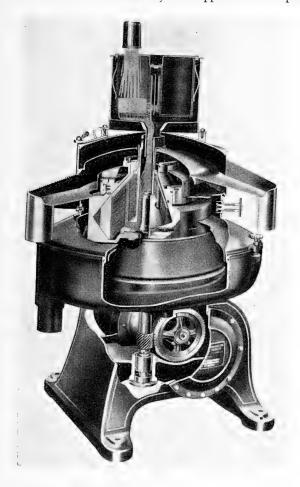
The internal construction of the Nozljector is shown by the cut-away view of this machine.
